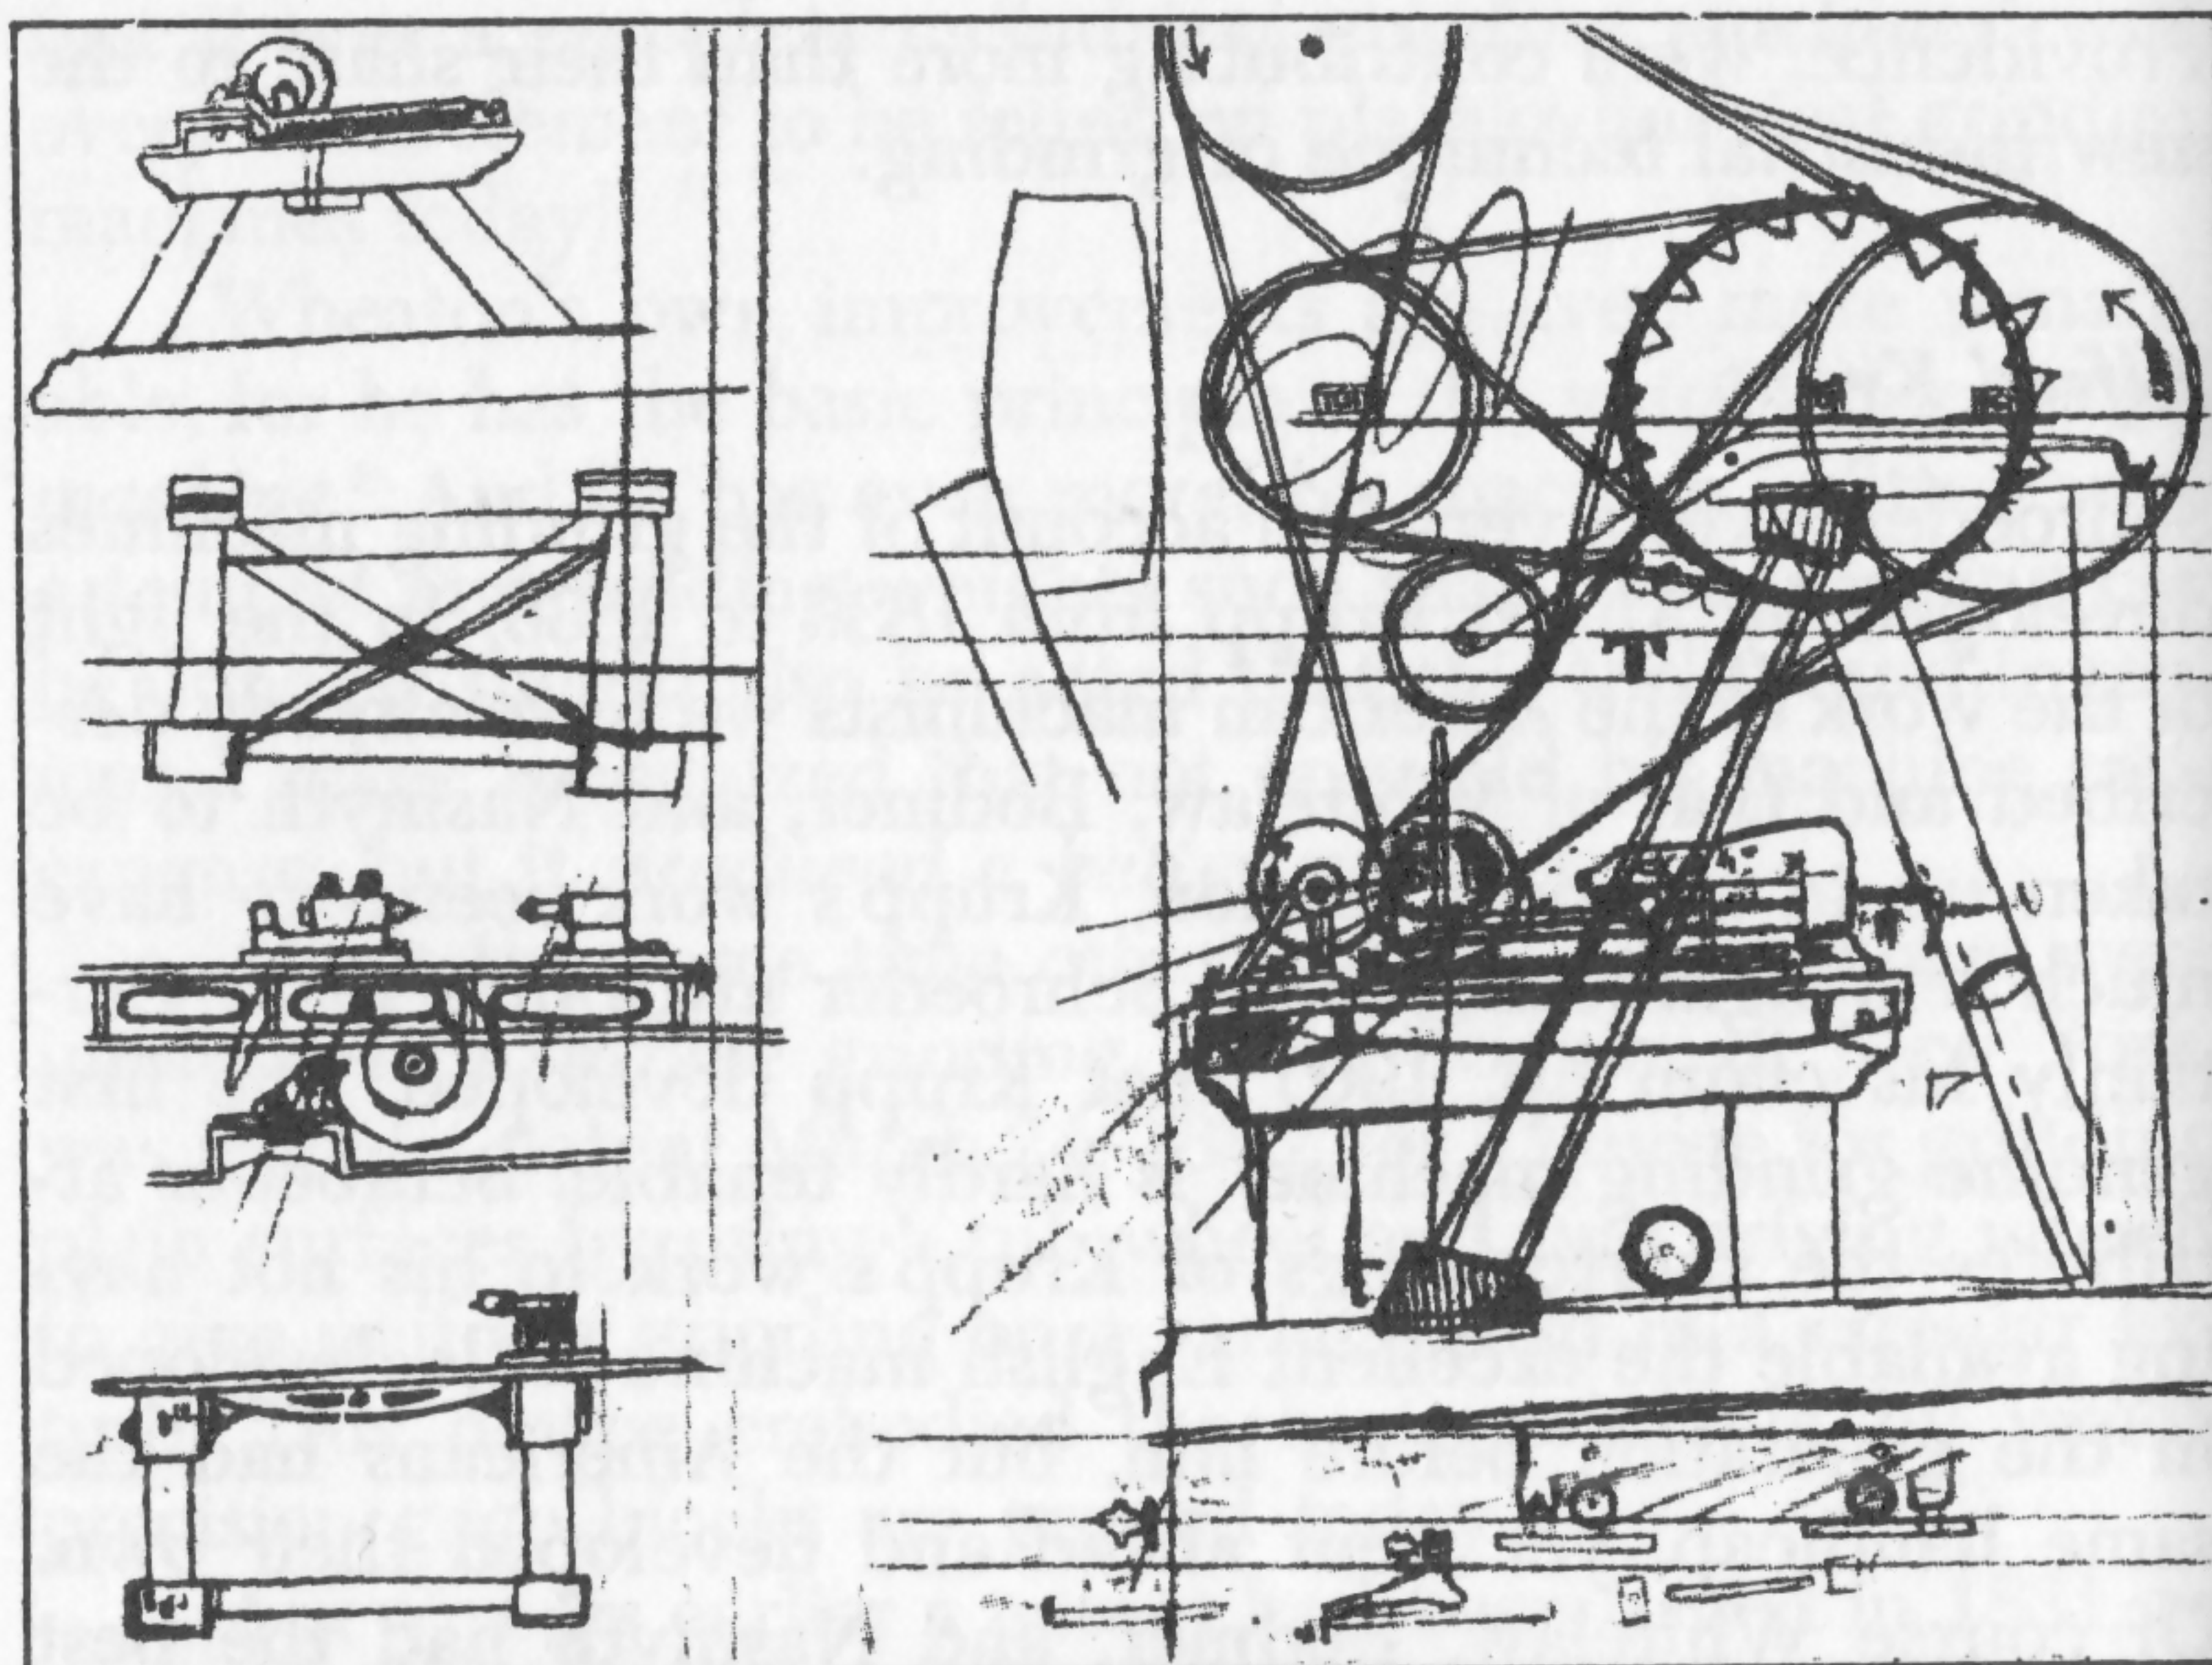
KRUPP'S LARGE GRINDING MACHINE, 1836 (Schroeder)
